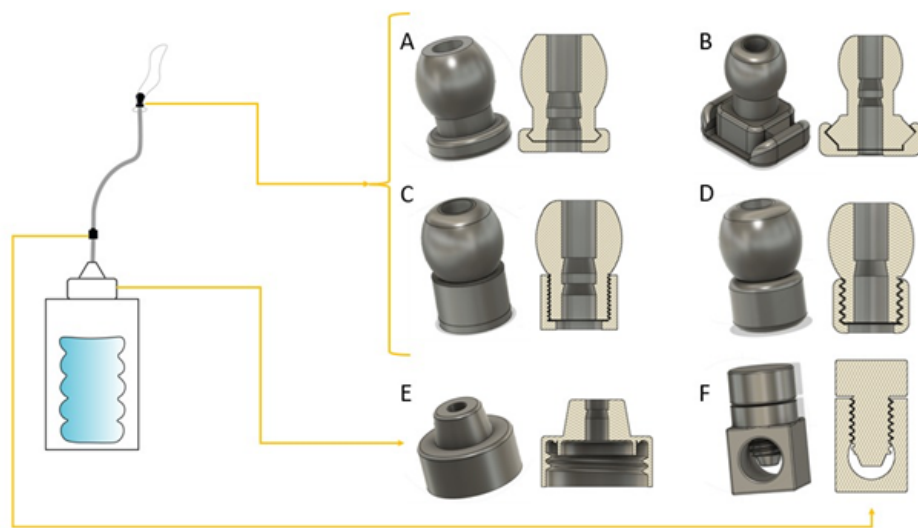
The prototype system, with CAD images of parts for 3D printing: A-D valves of different design: A, rounded snap-fit valve, B, square snap-fit valve, C, fine threaded valve, D, coarse-threaded valve; E modified bottle cap with plug and v seals, compatible with common soda bottles; F, flow stopper, a variety of globe valve preventing flow back of water down the tube.
